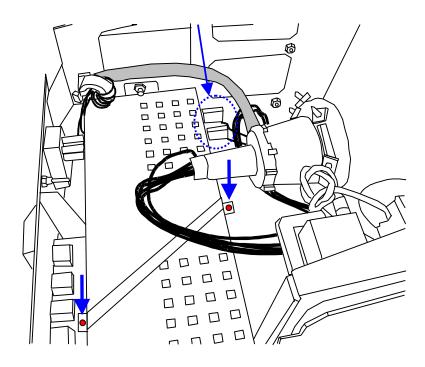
1-13. Bracket holding the Power Supply and connectors to it
